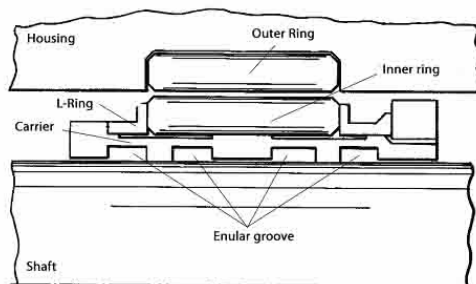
Representation of shaft, housing, sliding bearing and flexibly implemented carrier of the inner ring [14]
